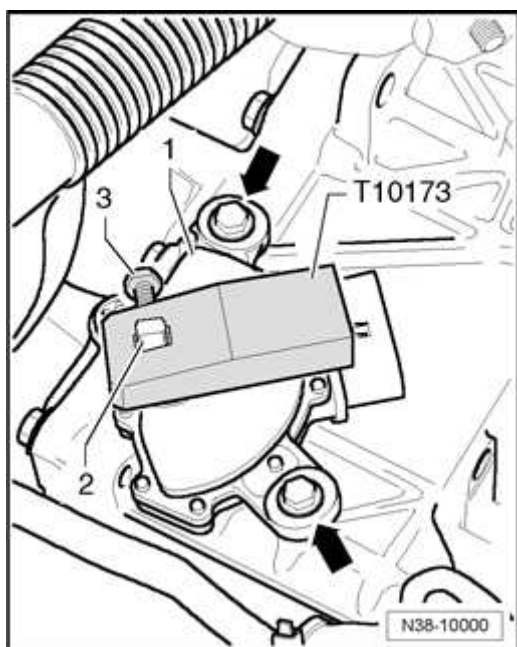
Adjustment Tool Attached Onto Shift Rod
